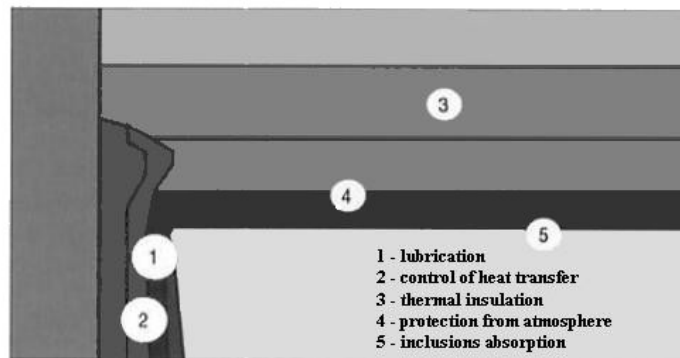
Schematic drawing of the various layers formed in the mould.<sup>(2)</sup>
